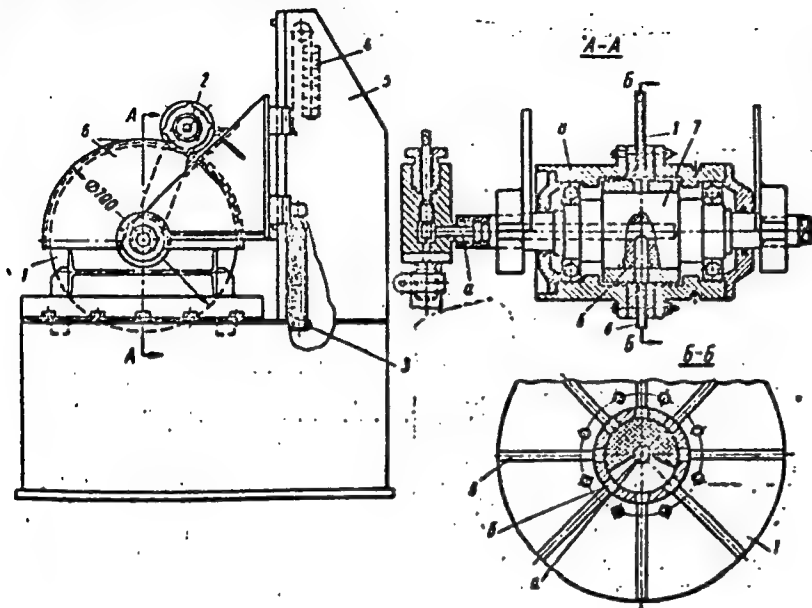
Machine for air metal-arc cutter (general and side views): 1 - disk electrode; 2 - disk servo-rotor, 3 - disk servo-feed; 4 - counterweight; 5 - frame; 6 - disk casing; 7 - axis; 8 - connecting piece.
